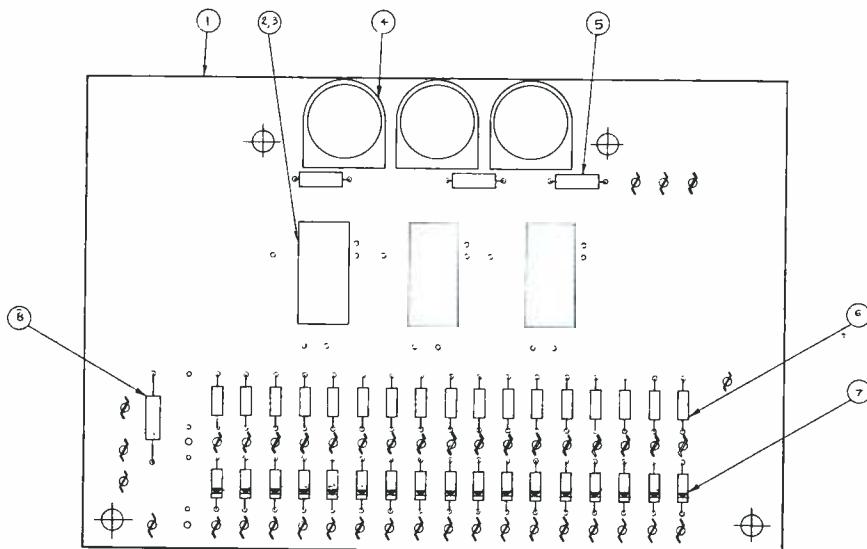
Address Control Keyboard P.C. Board Assembly.
